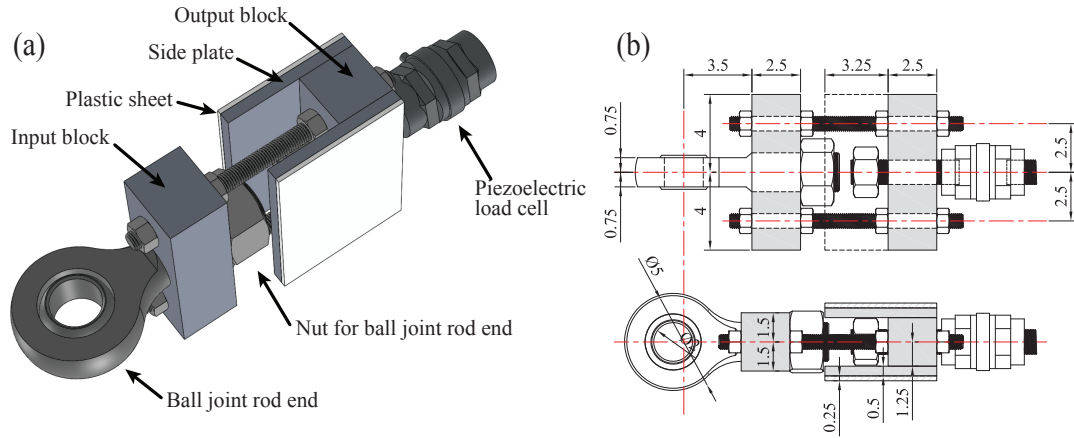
Design of the ball joint connector: (a) perspective view and (b) side view and top view (units: inch).
